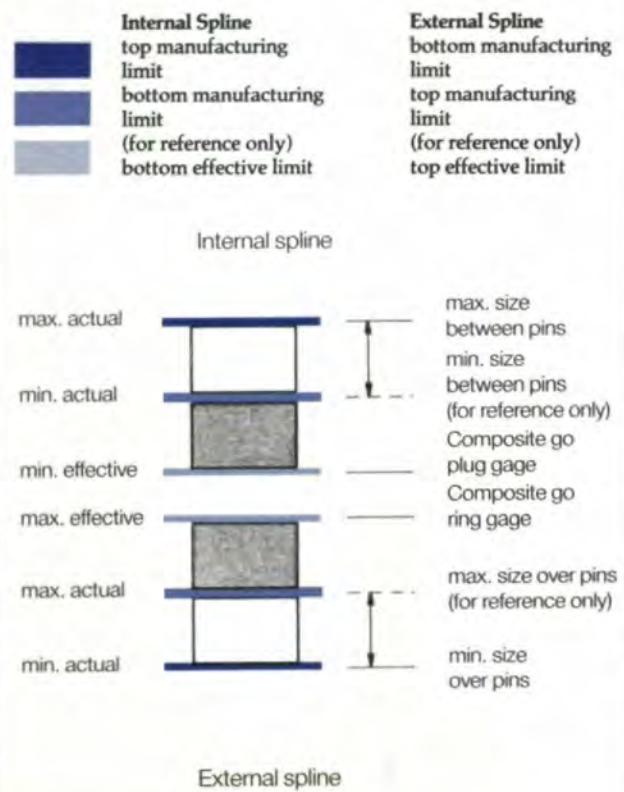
Spline tolerancing system using no-go gages.
